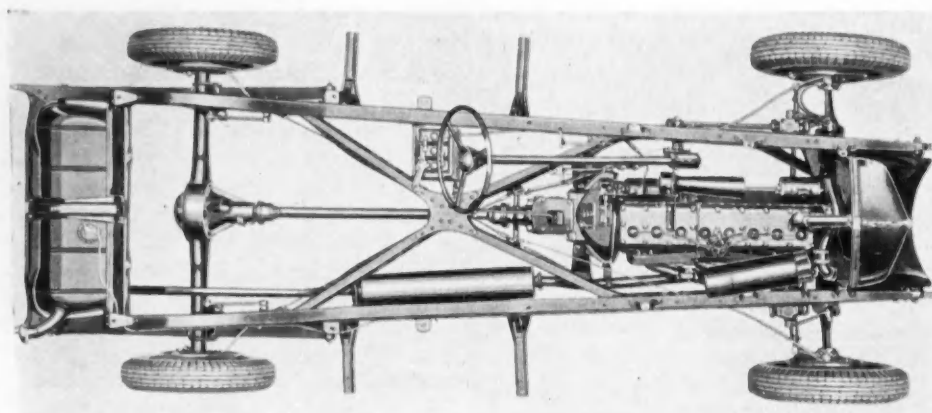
OLDSMOBILE-EIGHT CHASSIS, SHOWING SHORT BRAKE CROSS-SHAFT WITH DIAGONAL BRAKING
